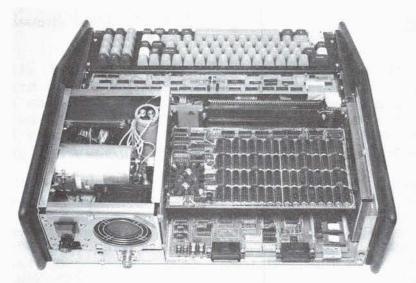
Sol-20 with covers removed. Rear side of assembly is in foreground and Sol-PC is just visible at lower right rear of assembly. 8KRA Memory is installed in expansion chassis above Sol-PC.
